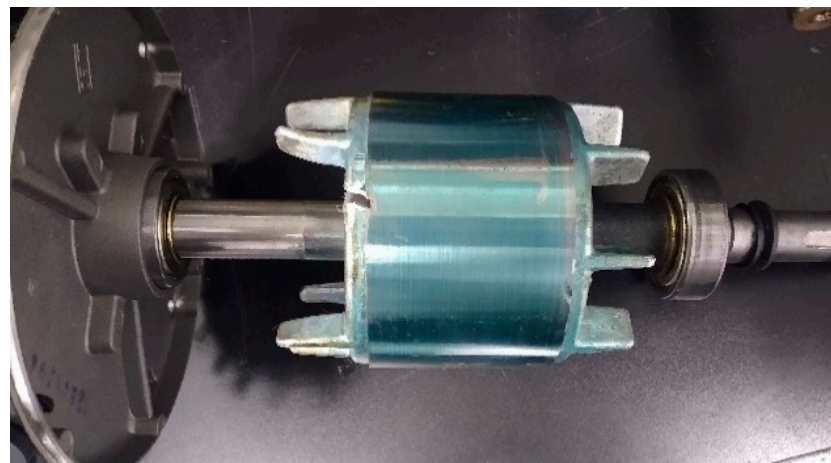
RCIM cracked ring rotor and broken rotor bar for analysis.
